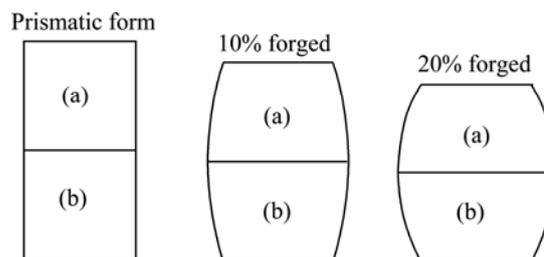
Illustration of open-die forging and specimen preparation: (a) Metallography sample; (b) Wear test sample
